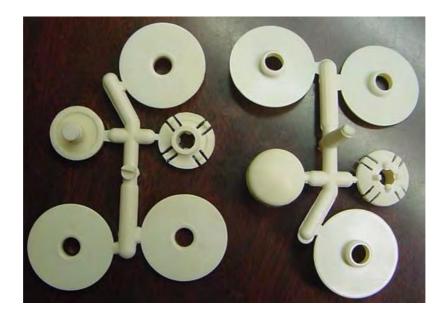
Off-tool prototype for a consumer product Source :< http://www.prototypingrapid.com/page/1042348>27/10/10
